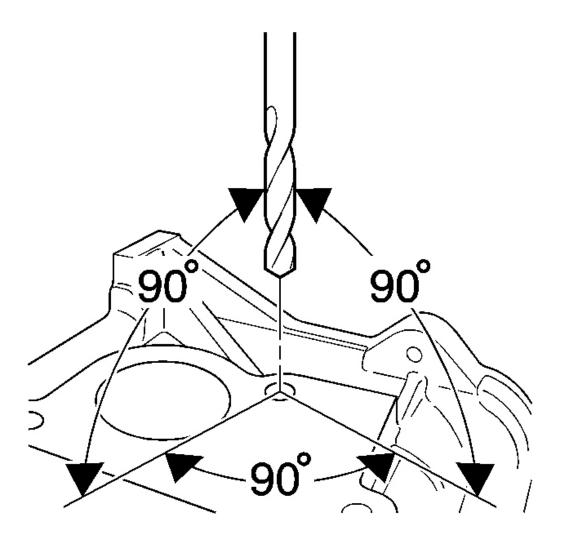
Identifying Proper Drilling Angle Courtesy of GENERAL MOTORS CORP.
